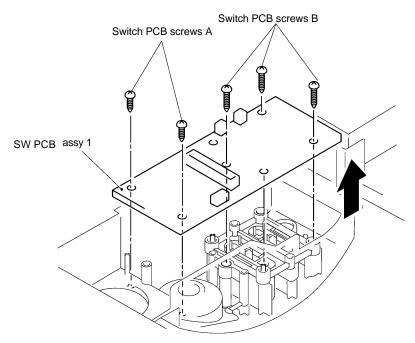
Removing the Switch PCB Assy (1)
